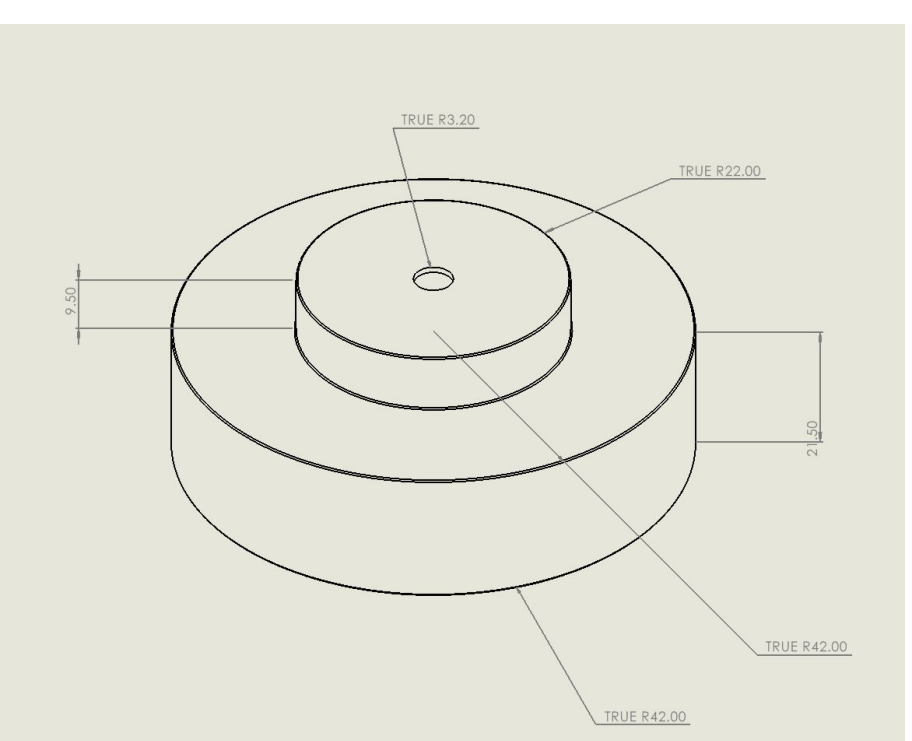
Isometric view of the mechanical intrathecal pump with dimensions. Created through SolidWorks.
